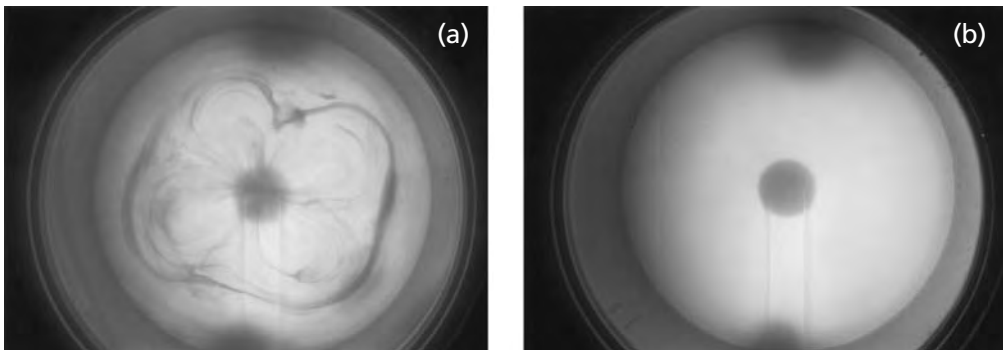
View inside injection moulded caps with back lighting. (a) Without check ring mixer, (b) With check ring mixer.
